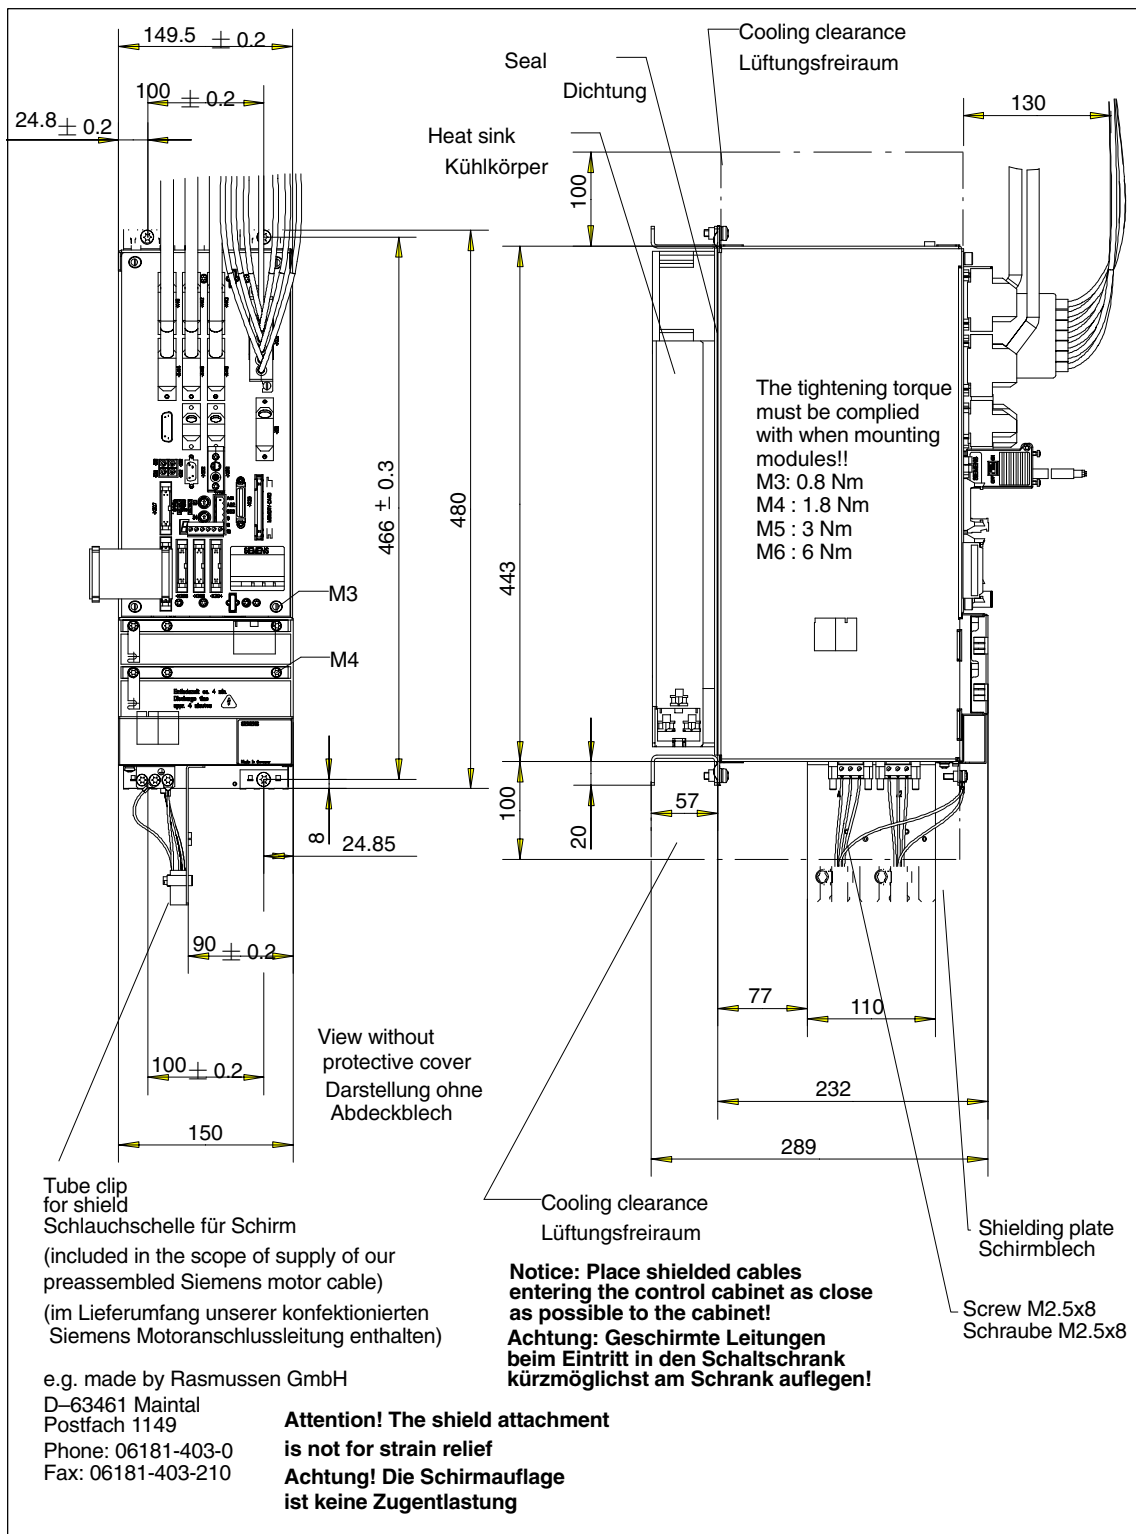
Dimension drawing of the 2-axis CCU box
